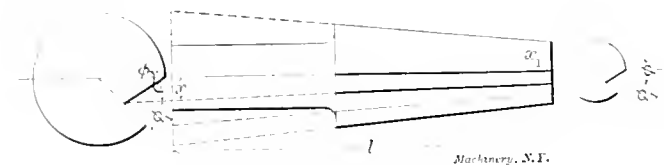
Case of a Taper Reamer milled by a Double-angle Cutter.
